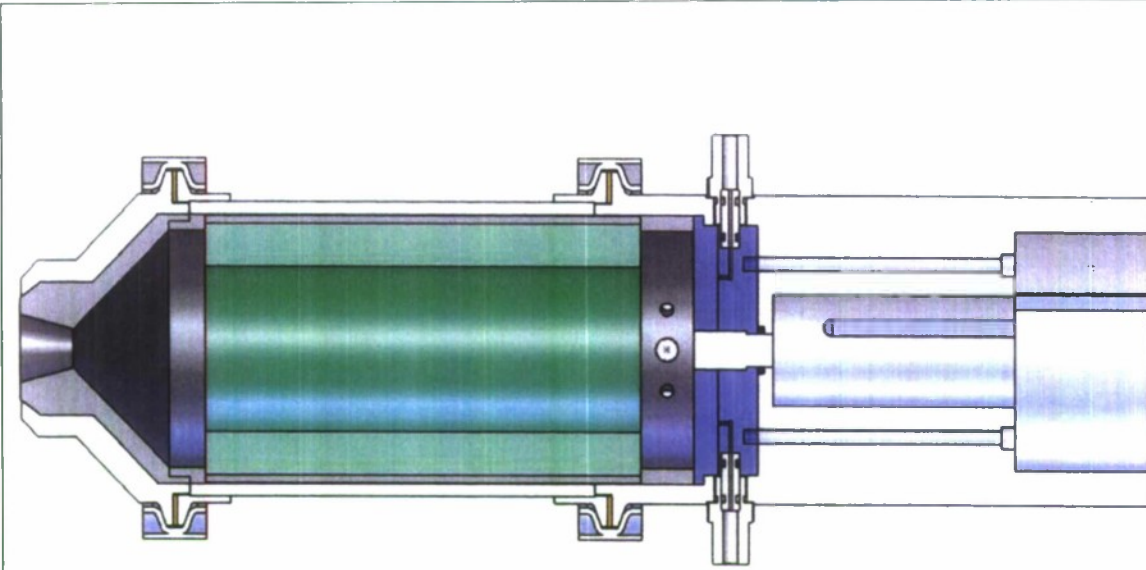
Design rendering of our hybrid rocket motor with a conical nozzle and a single hollow fuel grain.
